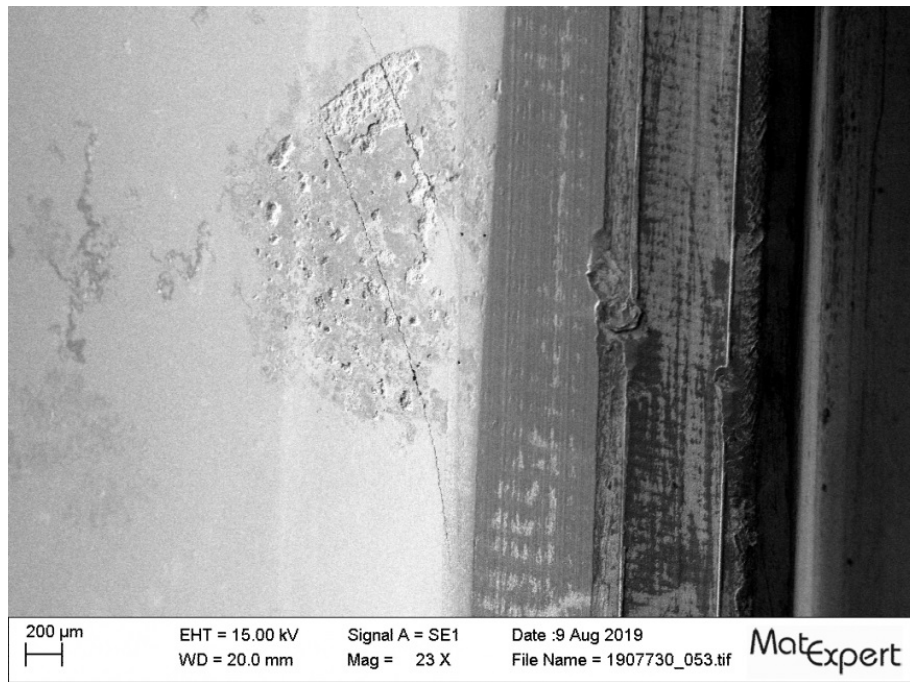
Bearing no. 4, outer-race bearing track – damage due to material chipping and cracks.
